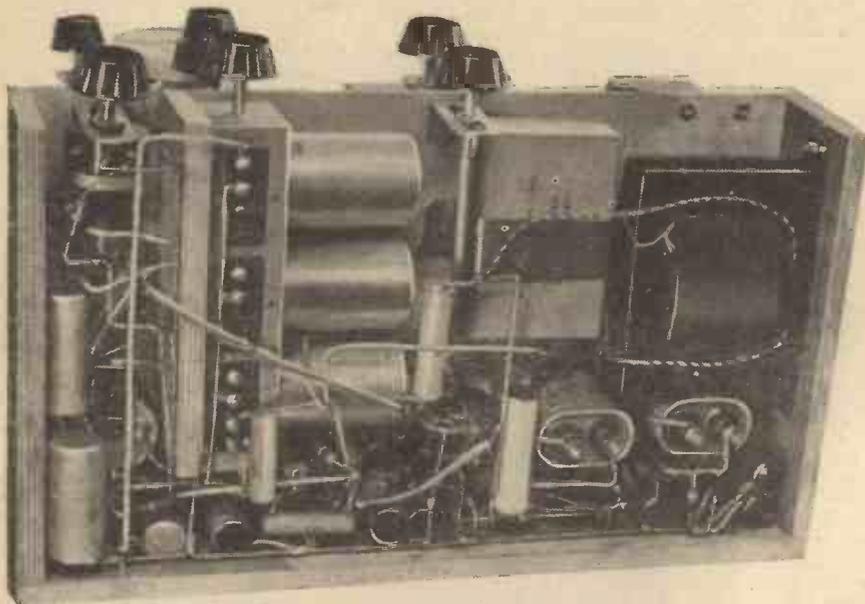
Underside, showing position of components and wiring. Note method of mounting the coil unit.
